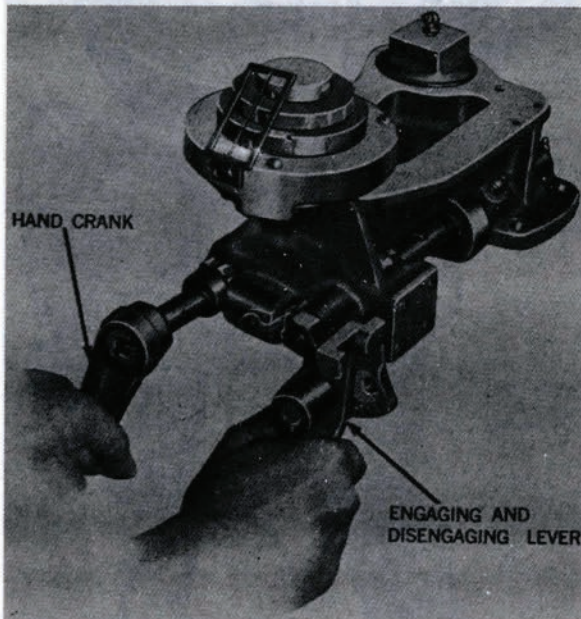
Depth Setting Mechanism Vertical Assembly Parts.
